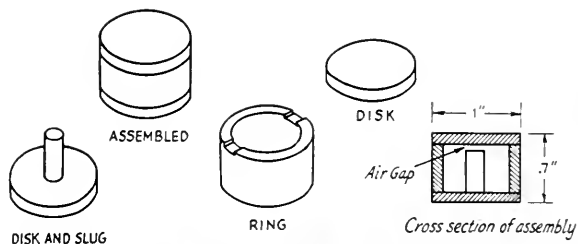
Component parts and assembled pot core (Ferroxcube D-25/17.5).
